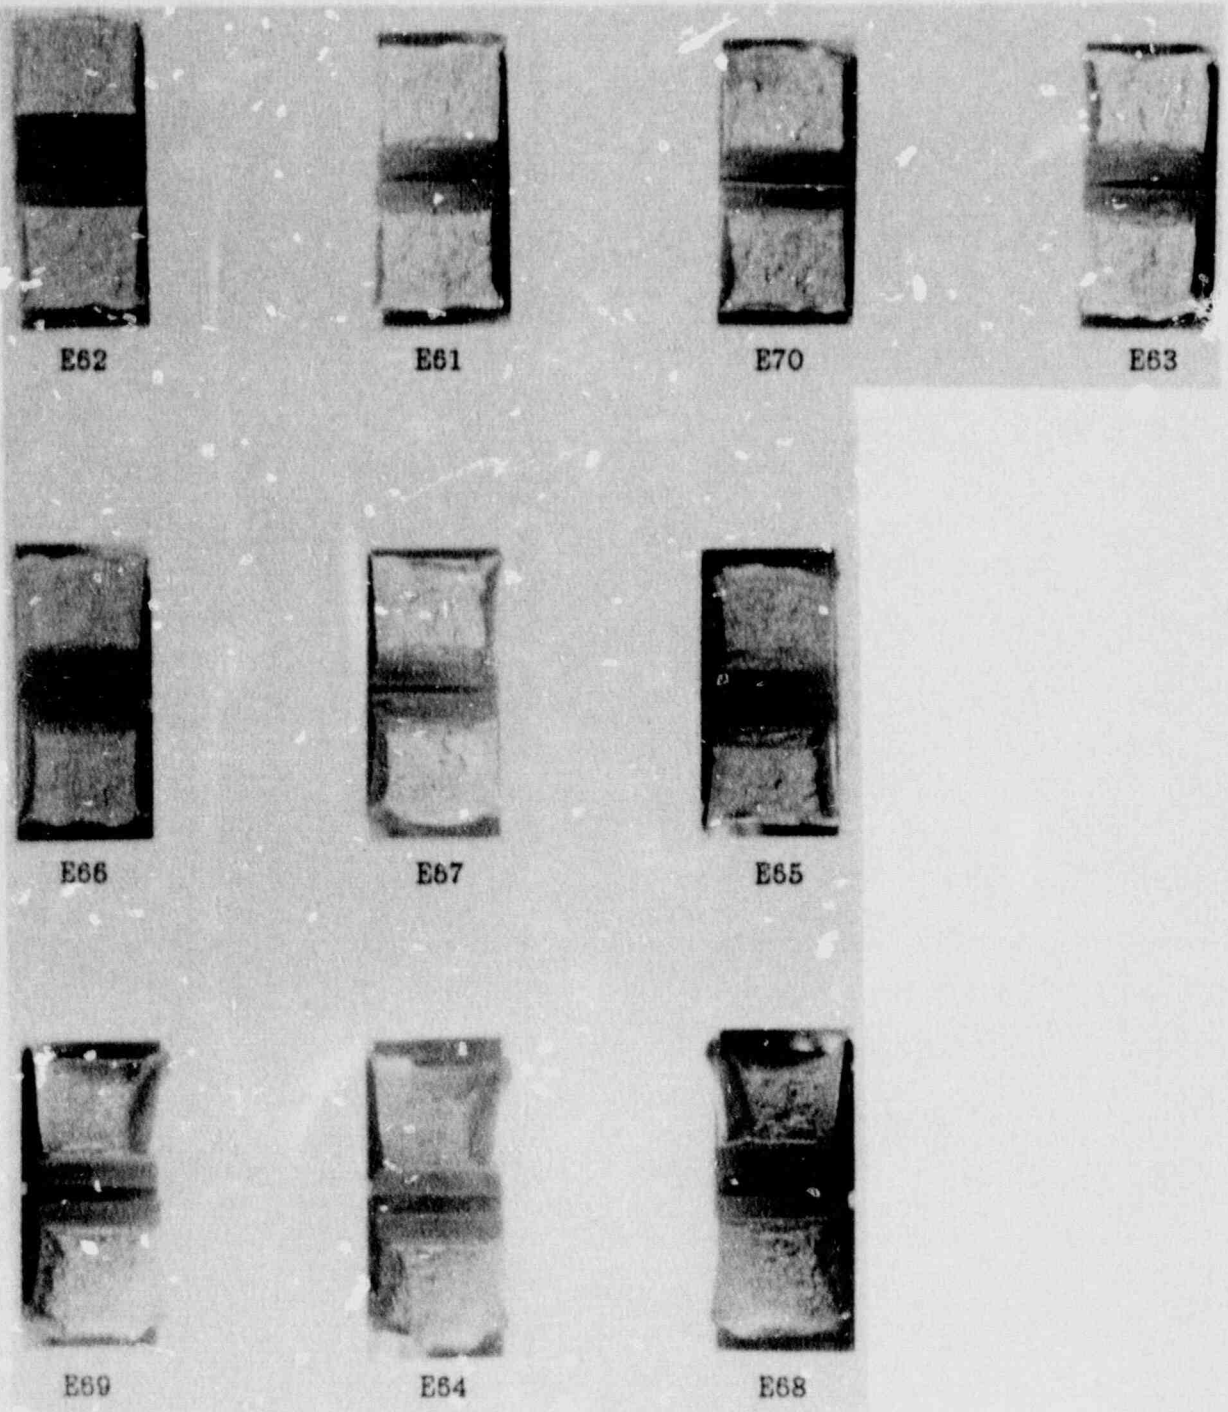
CHARPY IMPACT SPECIMEN FRACTURE SURFACES FOR ZION UNIT 2 REACTOR VESSEL SHELL PLATE C4007-1 (LONGITUDINAL ORIENTATION)
